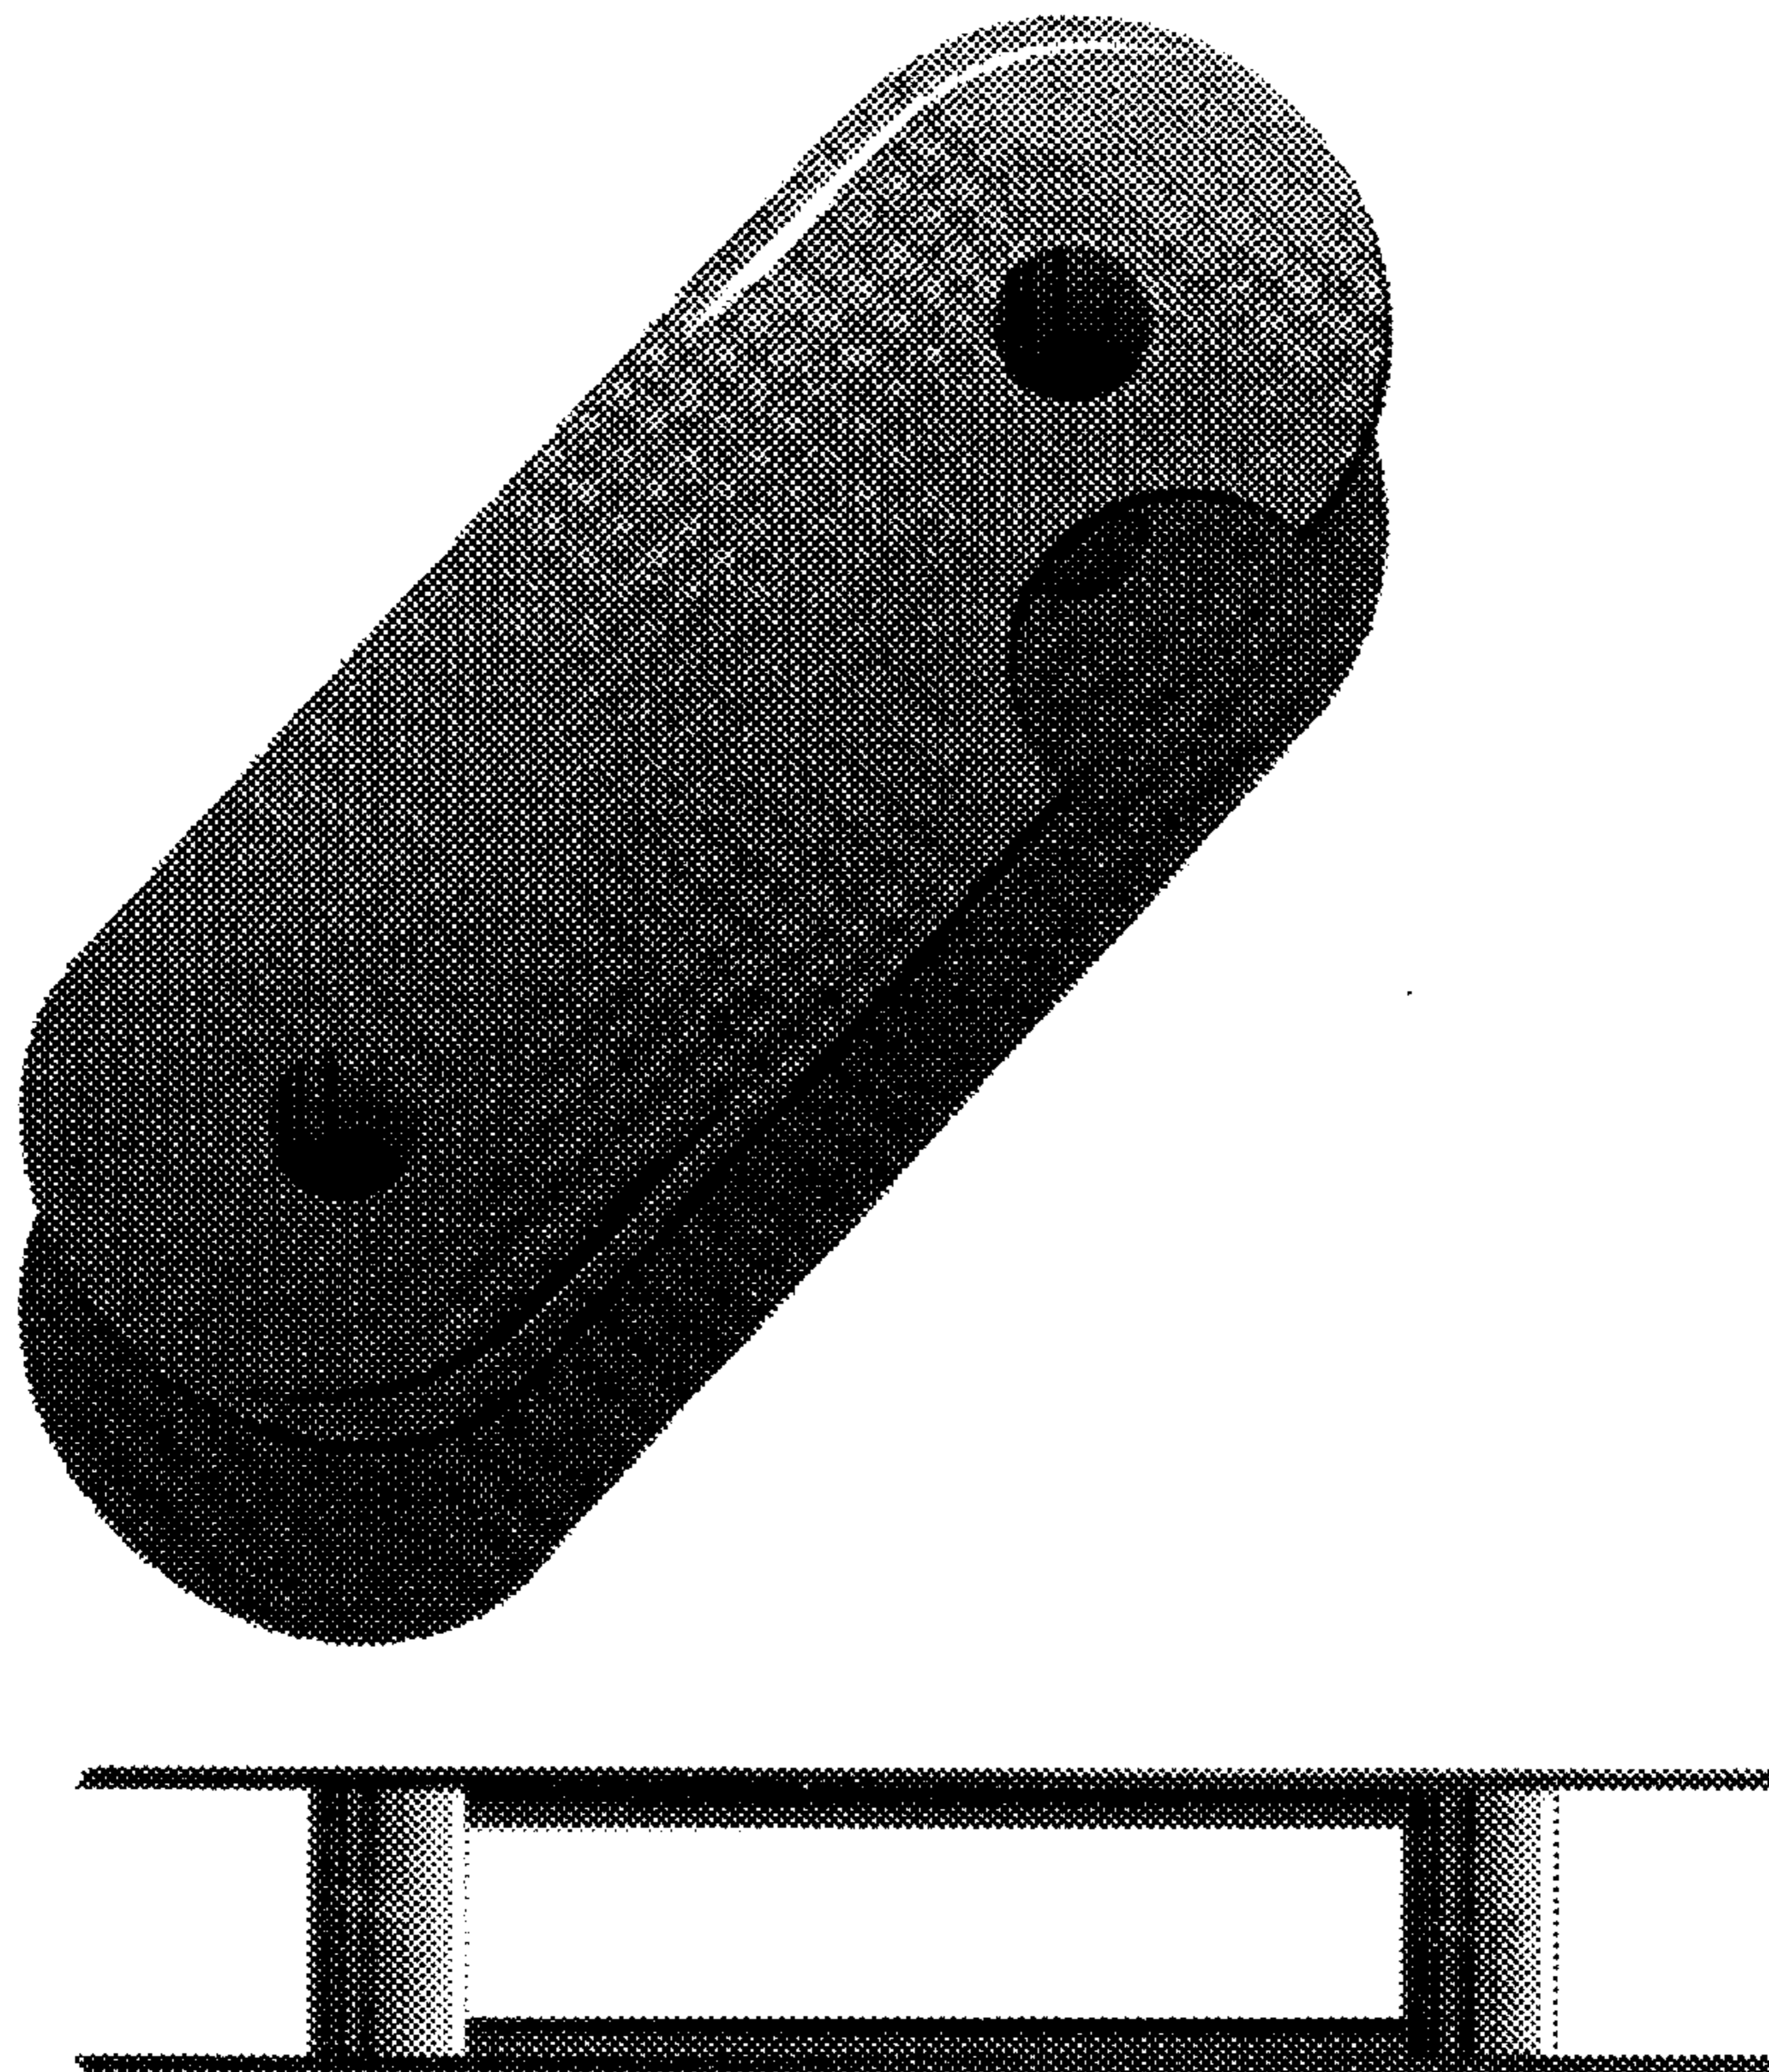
is a perspective view thereof with the broken line showing of twine being for illustrative purposes only and forming no part of the claimed design;
